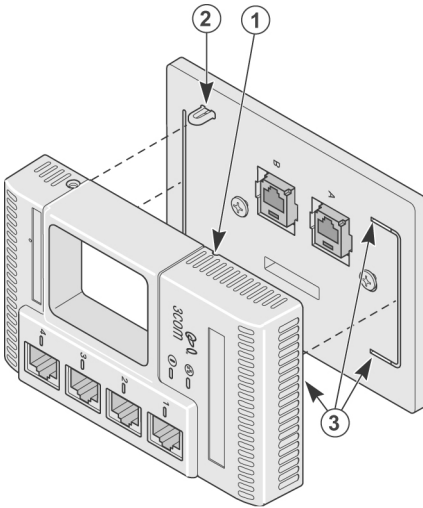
Mounting the NJ95 to the Manufacturer-specific Wall plate
